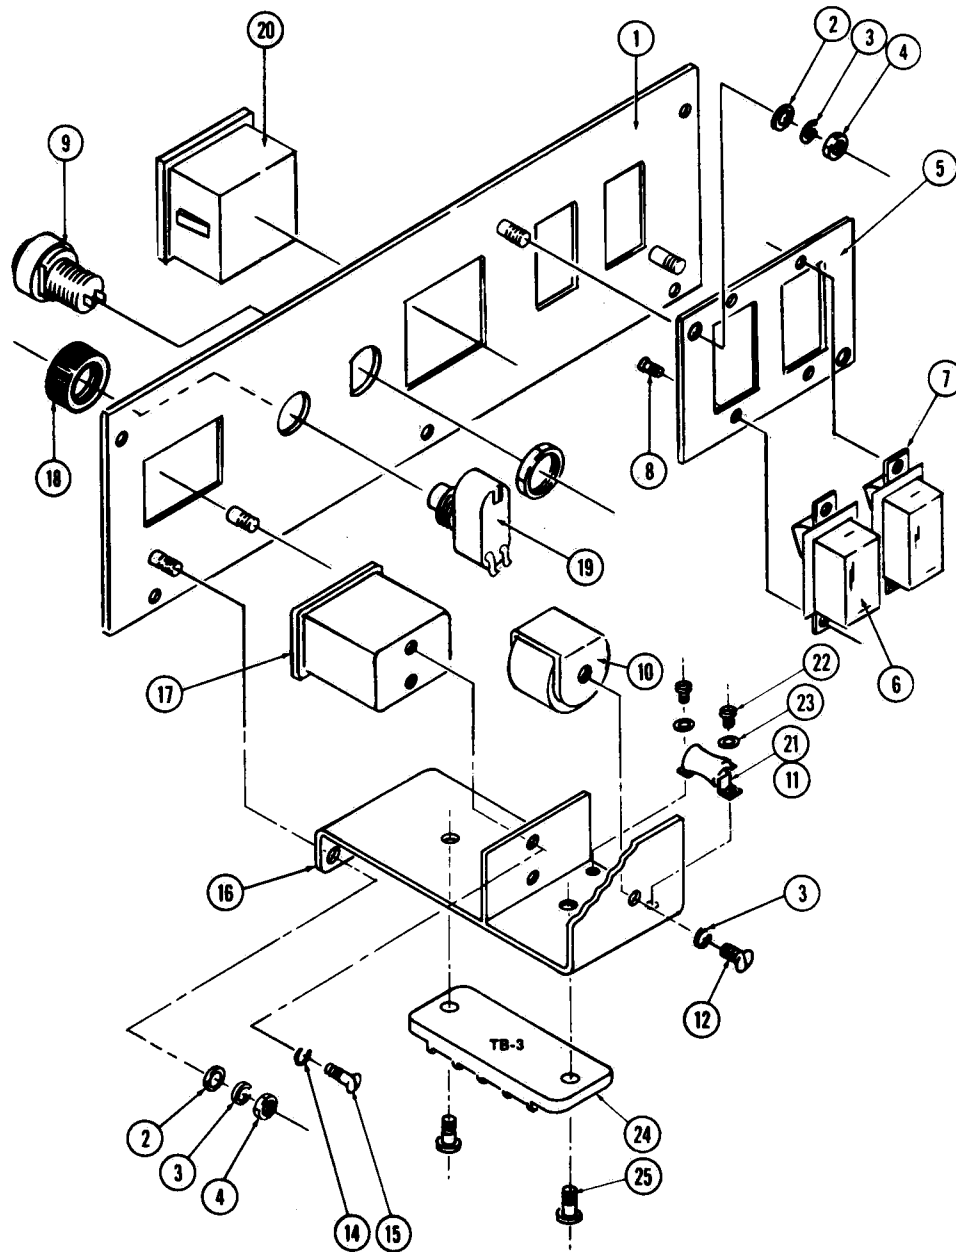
SECONDARY PANEL ASSEMBLY (Part 1 of 3).
